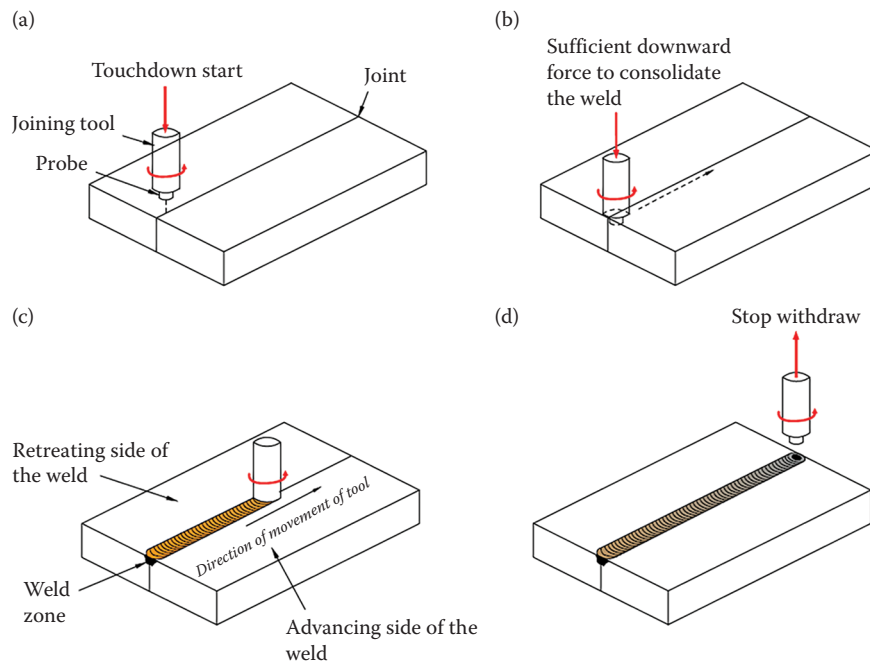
Schematic showing FSW: (a) commence welding; (b) force down to consolidate; (c) weld is advancing; and (d) completion of weld and withdrawal of tool
